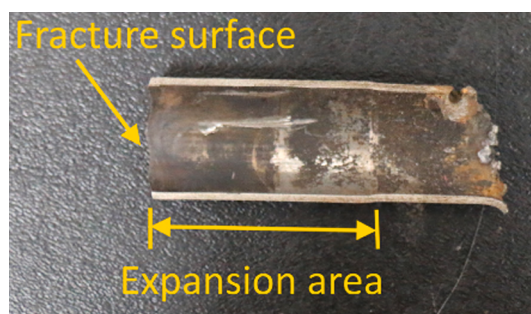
Vibration induced fatigue defect at tube-to-tubesheet joint [27].
